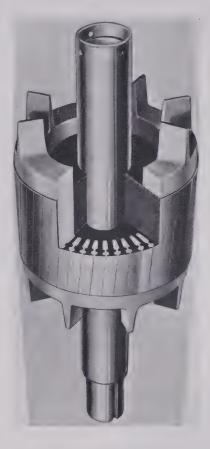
Cutaway quarter section of a double squirrel-cage rotor for a hollow shaft vertical induction motor
